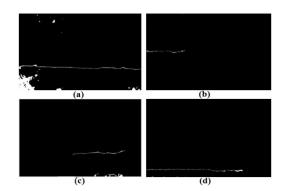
Surface cracks identified through image clustering for different weld rotational speed [(a) 600rpm, 30mm/min, 2.5kN, TT tool,
